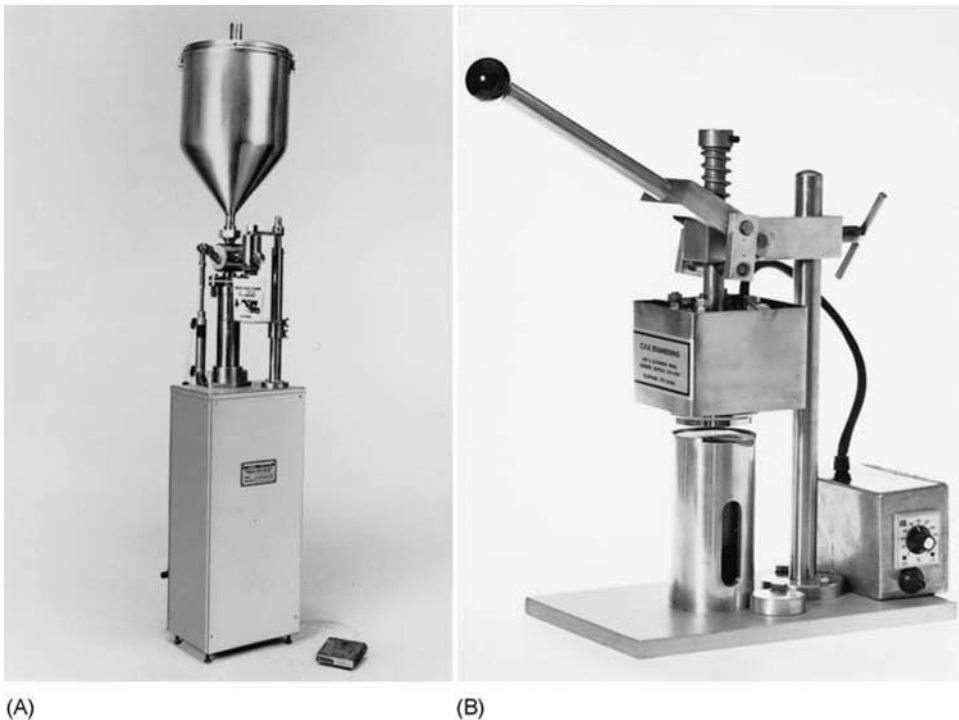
Small filling machine (A) and a thermostatically controlled heat sealer for aluminium foil lids (B).
